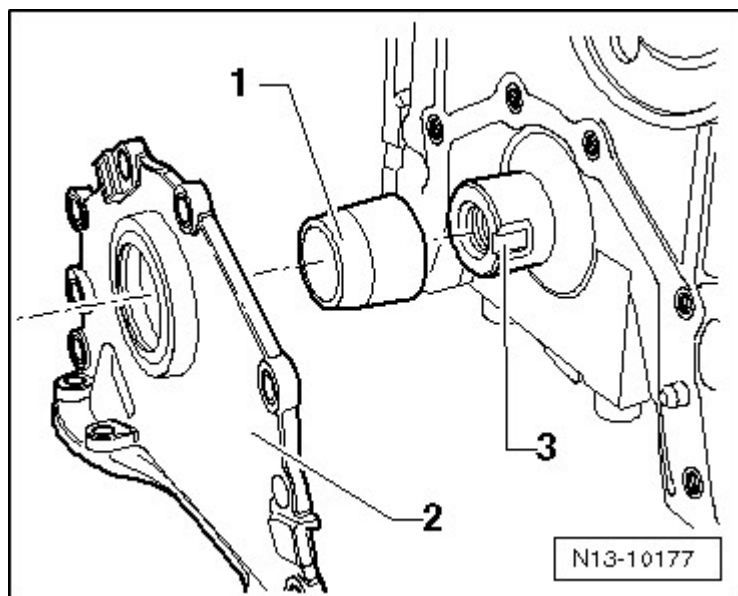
Identifying Guide Sleeve T10215/1, Crankshaft Pin & Sealing Ring
